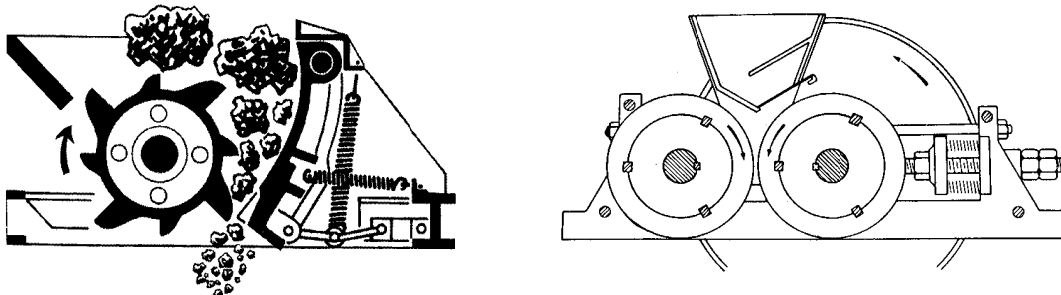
Toothed single crushing roll (left), double crushing roll with flat surface (right) [SACPS (l), Wills (r)].
